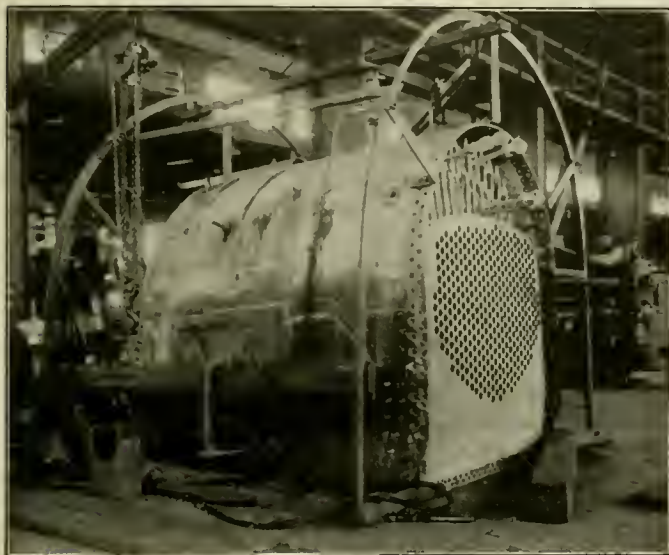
Jig for Drilling Holes in Firebox Wrapper Sheets
